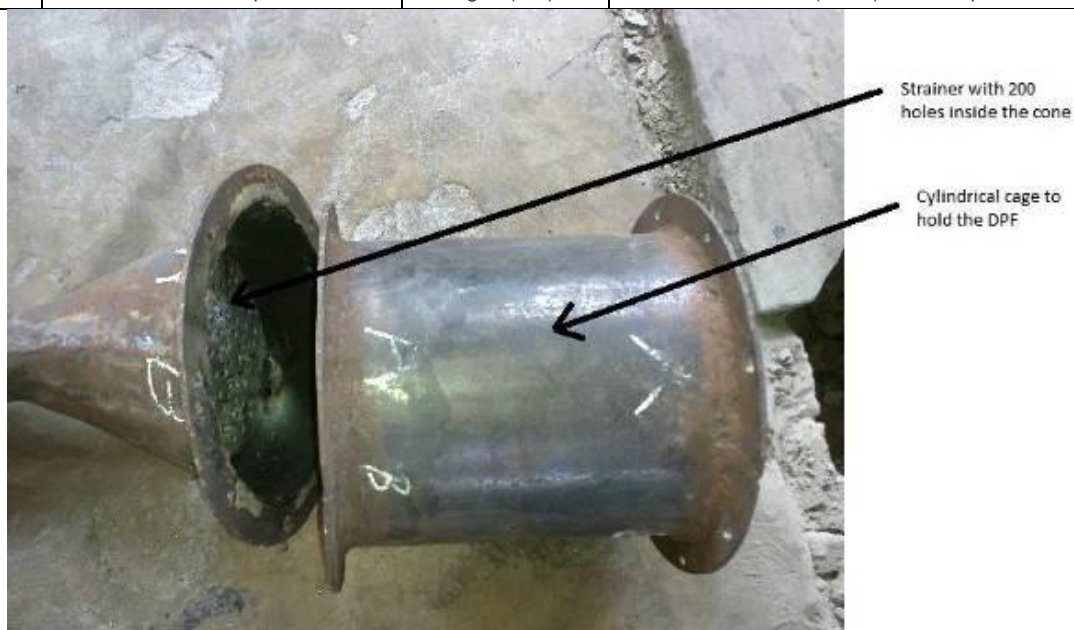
Cylindrical DPF cage and cone with strainer welded inside.
